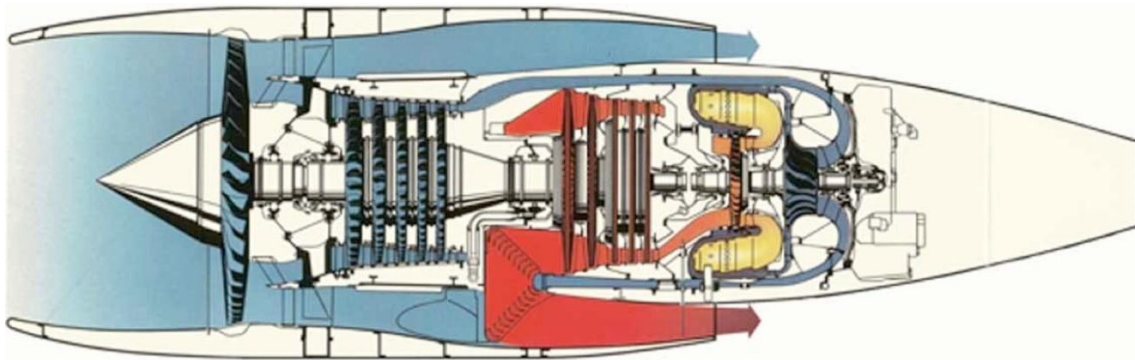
Cross-sectional view of the ATF3 engine [33]
